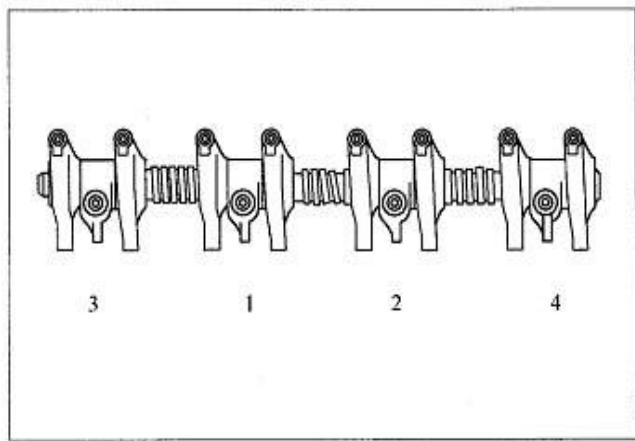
Tighten Bolts of Am Rocker Shaft According to the Order
